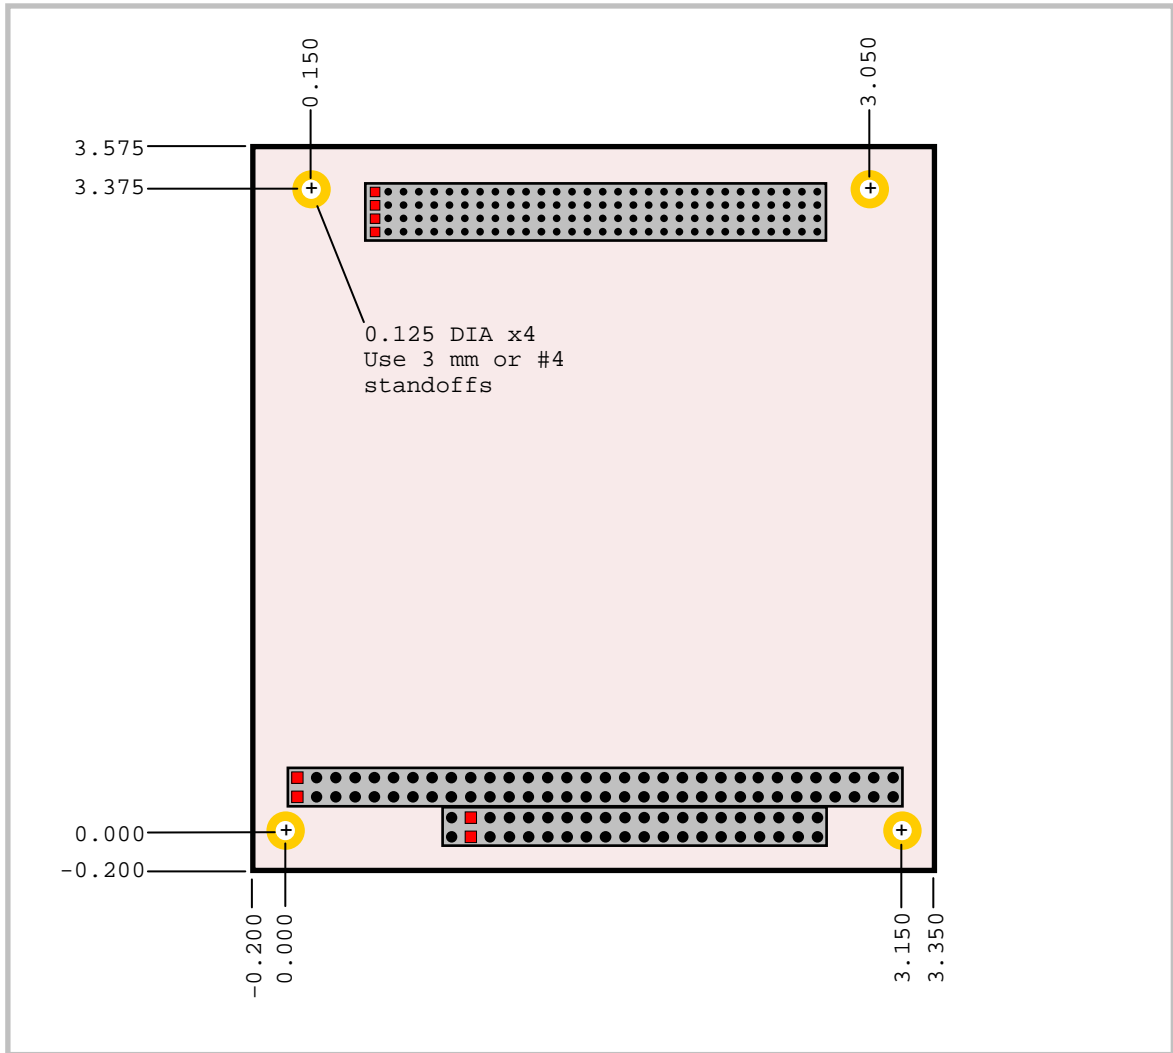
VL-EPM-E2 Dimensions and Mounting Holes
